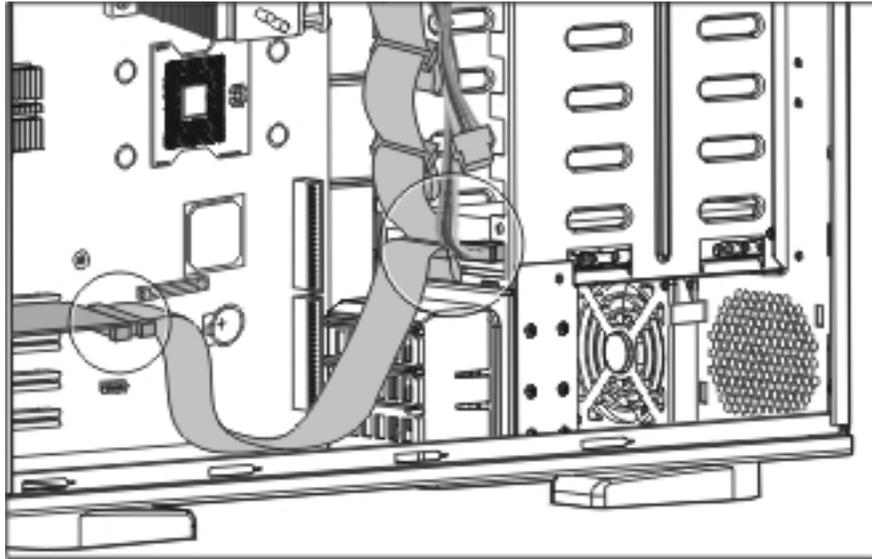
SCSI non-hot-plug hard drive cable routing
